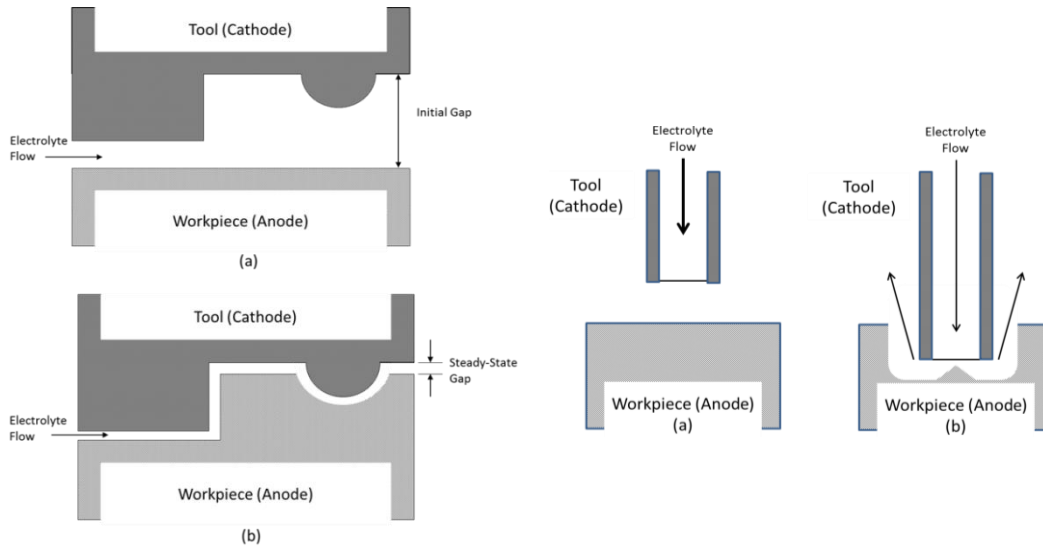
Initial (a) and final (b) tool/workpiece configurations in “cross-flow” (left) and “flow-through” (right) ECM.
